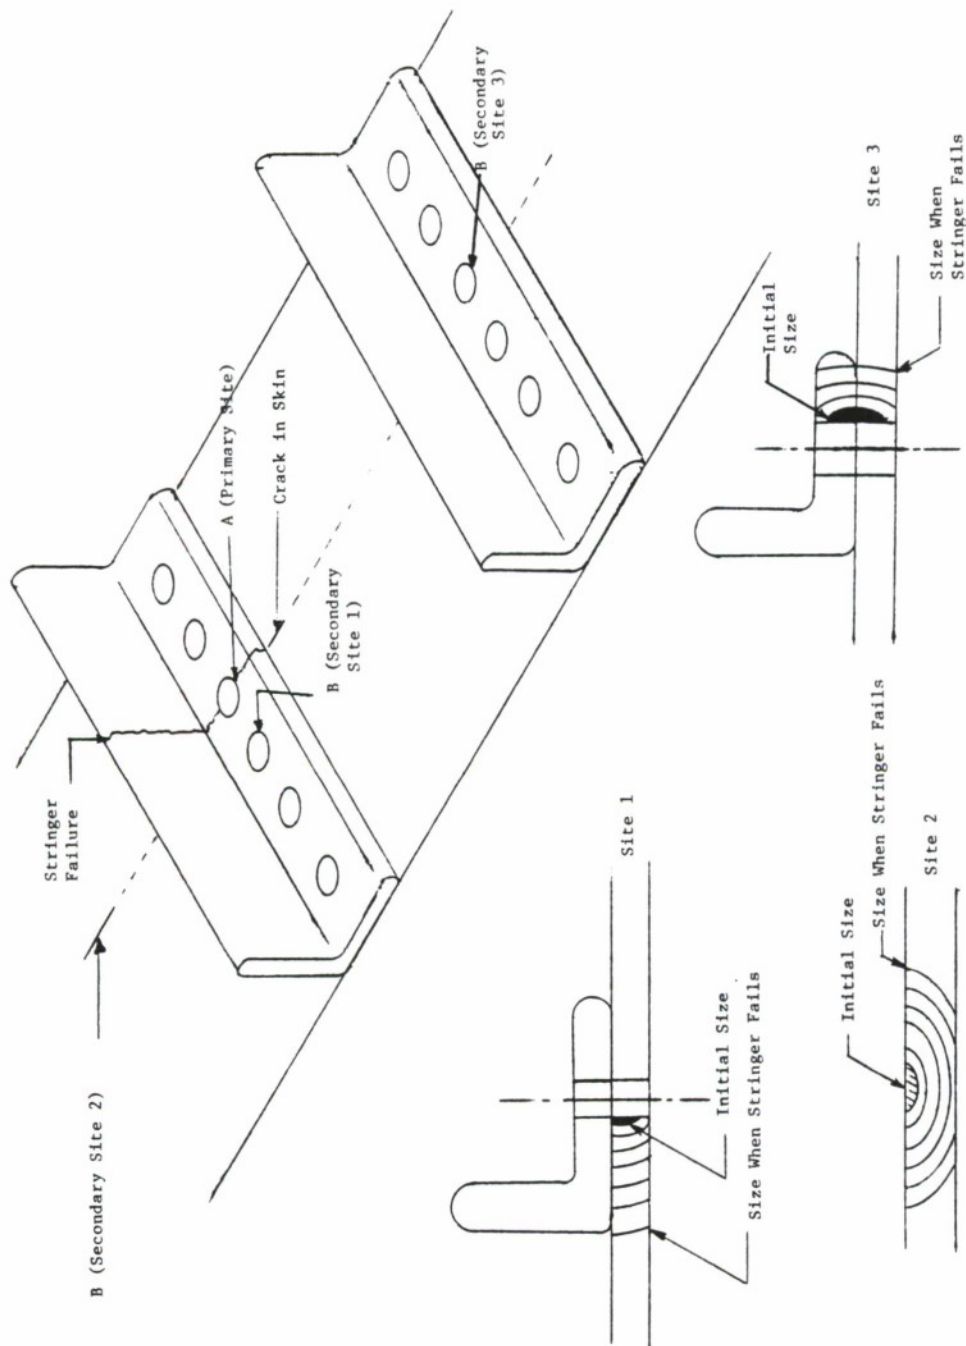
Example of Continuing Damage Types and Locations Assumed When Primary Damage Terminated Due to Element Failure.
